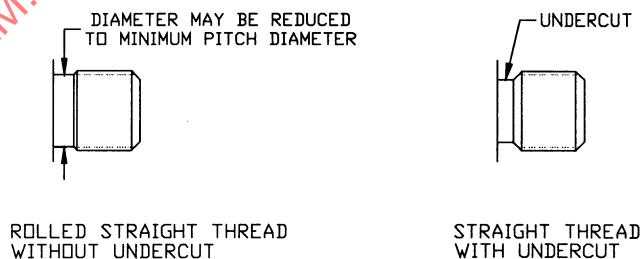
EXTERNAL ROLLED AND CUT STRAIGHT THREADS
